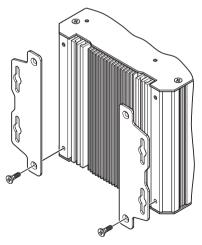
Wall bracket installation (BL2 BPC 1501S... shown)
